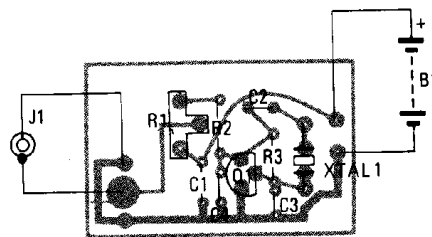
OUTPUT JACK, J1, can be mounted on PC board by drilling out large foil pad completely and running resistor lead to trace leading to it.
